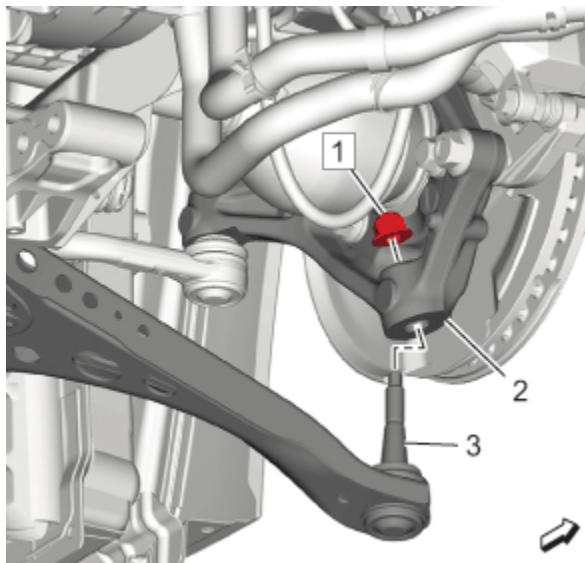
Steering Knuckle, Lower Ball Joint And Nut
